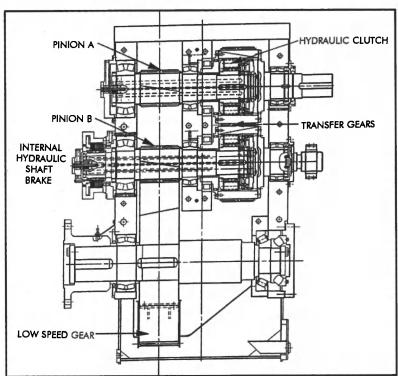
Reduction drive shown "unfolded." Pinions A and B both engage low-speed (propeller-shaft) gear at all times, but only one transmits torque at any time.
